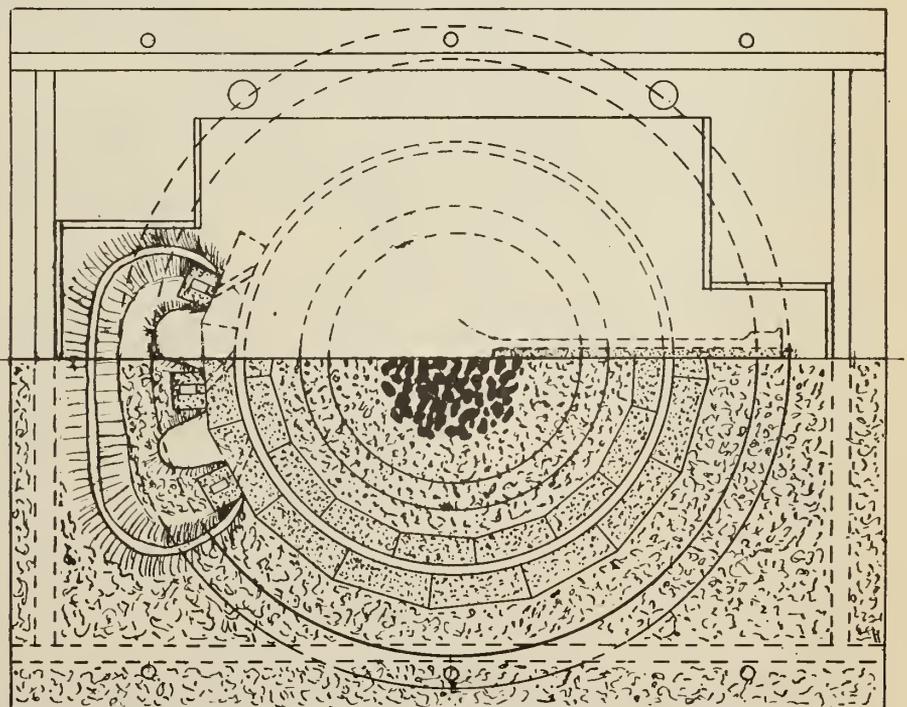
HALF SECTIONAL PLAN OF MOULD.
